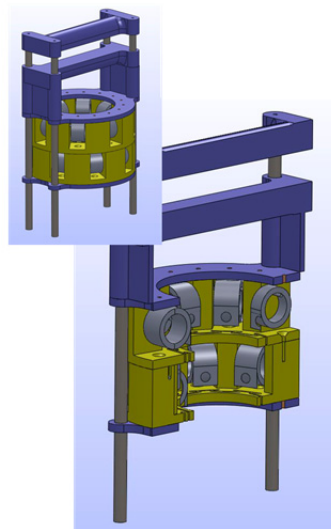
Universal actuation mechanism using arrayed constant force springs.
